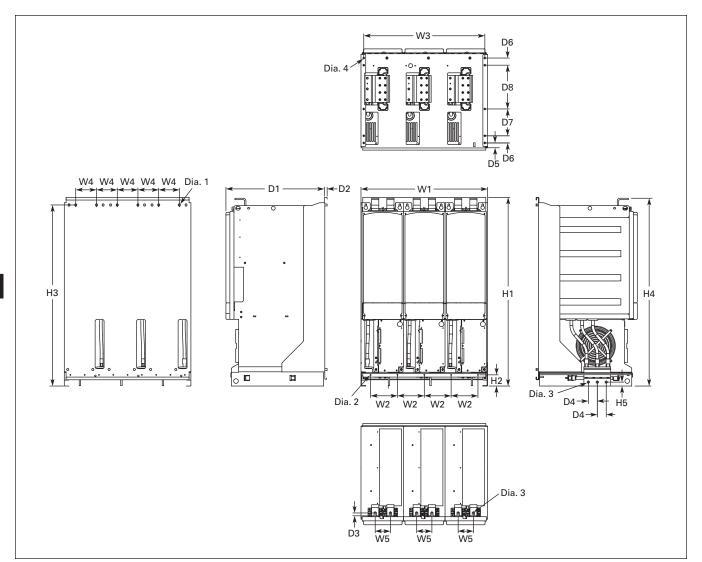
9000X Dimensions, FR13 Open Chassis Inverter
